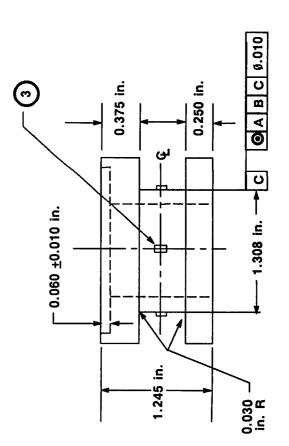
0.875-in. Cross Bolt Threaded Hole Plate
